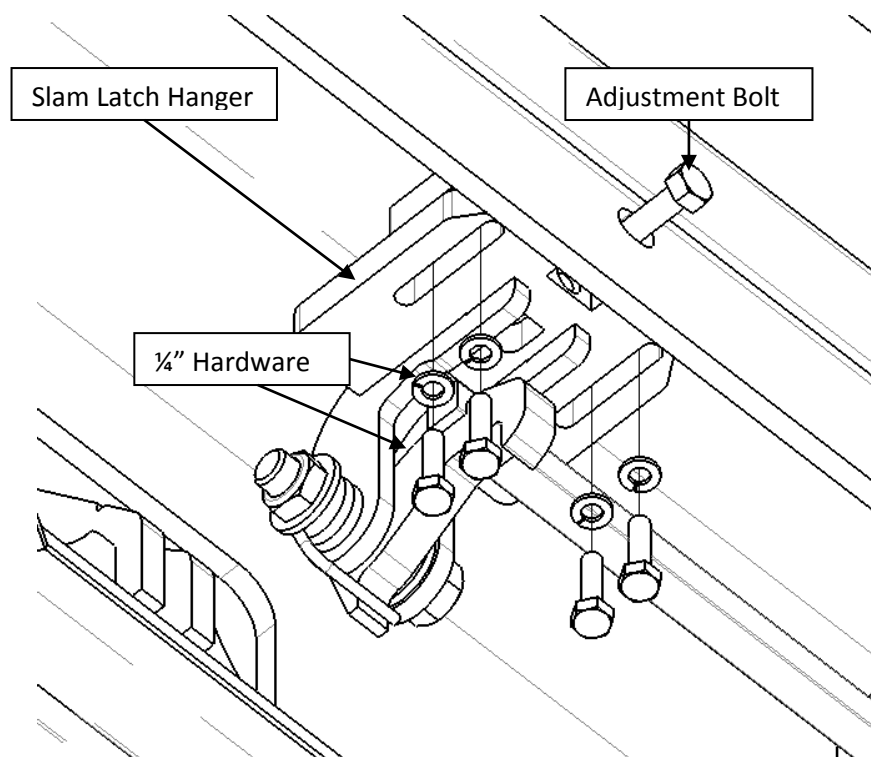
Slam Latch Hanger Assembly Removal (passenger side shown).
